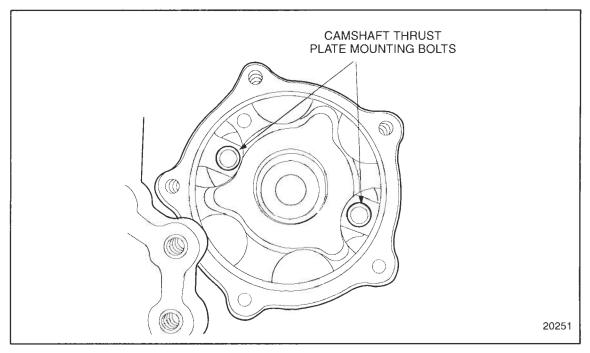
Camshaft Thrust Plate Retaining Bolts
